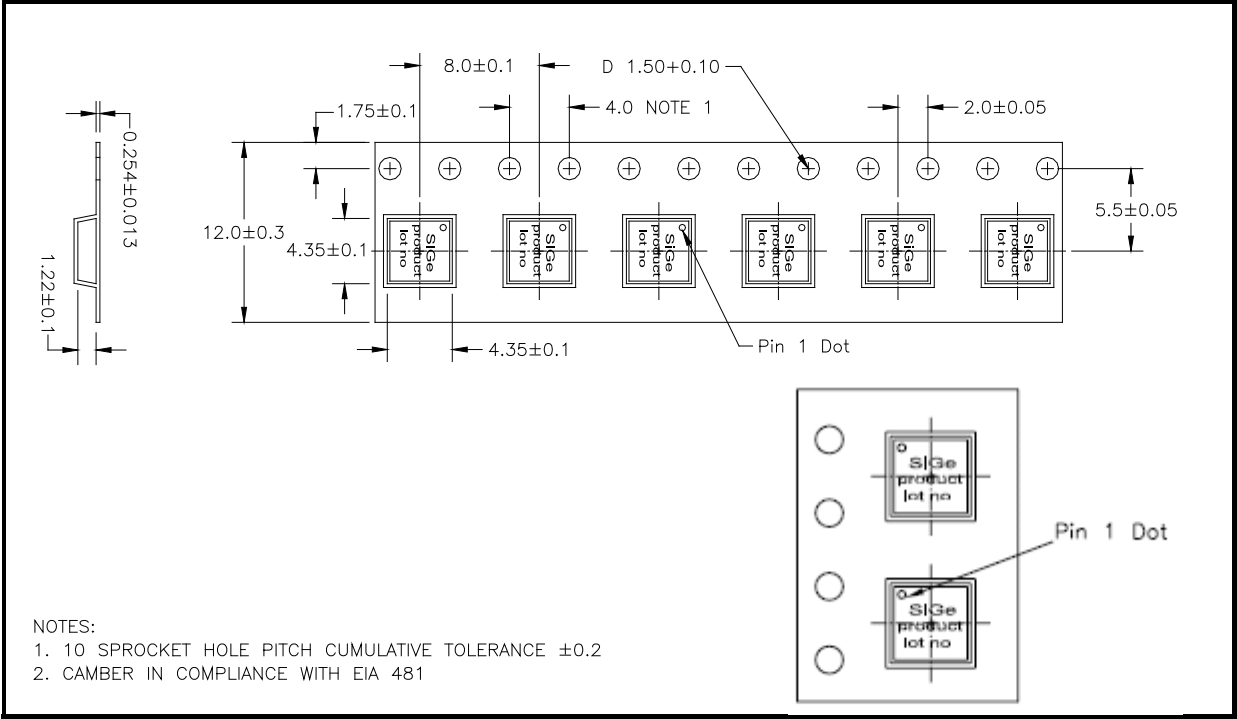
Detailed Tape and Reel Information (All dimensions in Millimeters)
